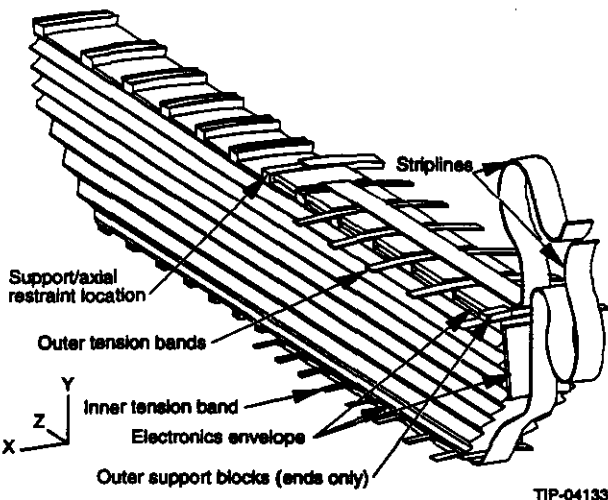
Isometric view of EM module showing bands that hold the assembly in tension, the preamplifier motherboards and cables.
